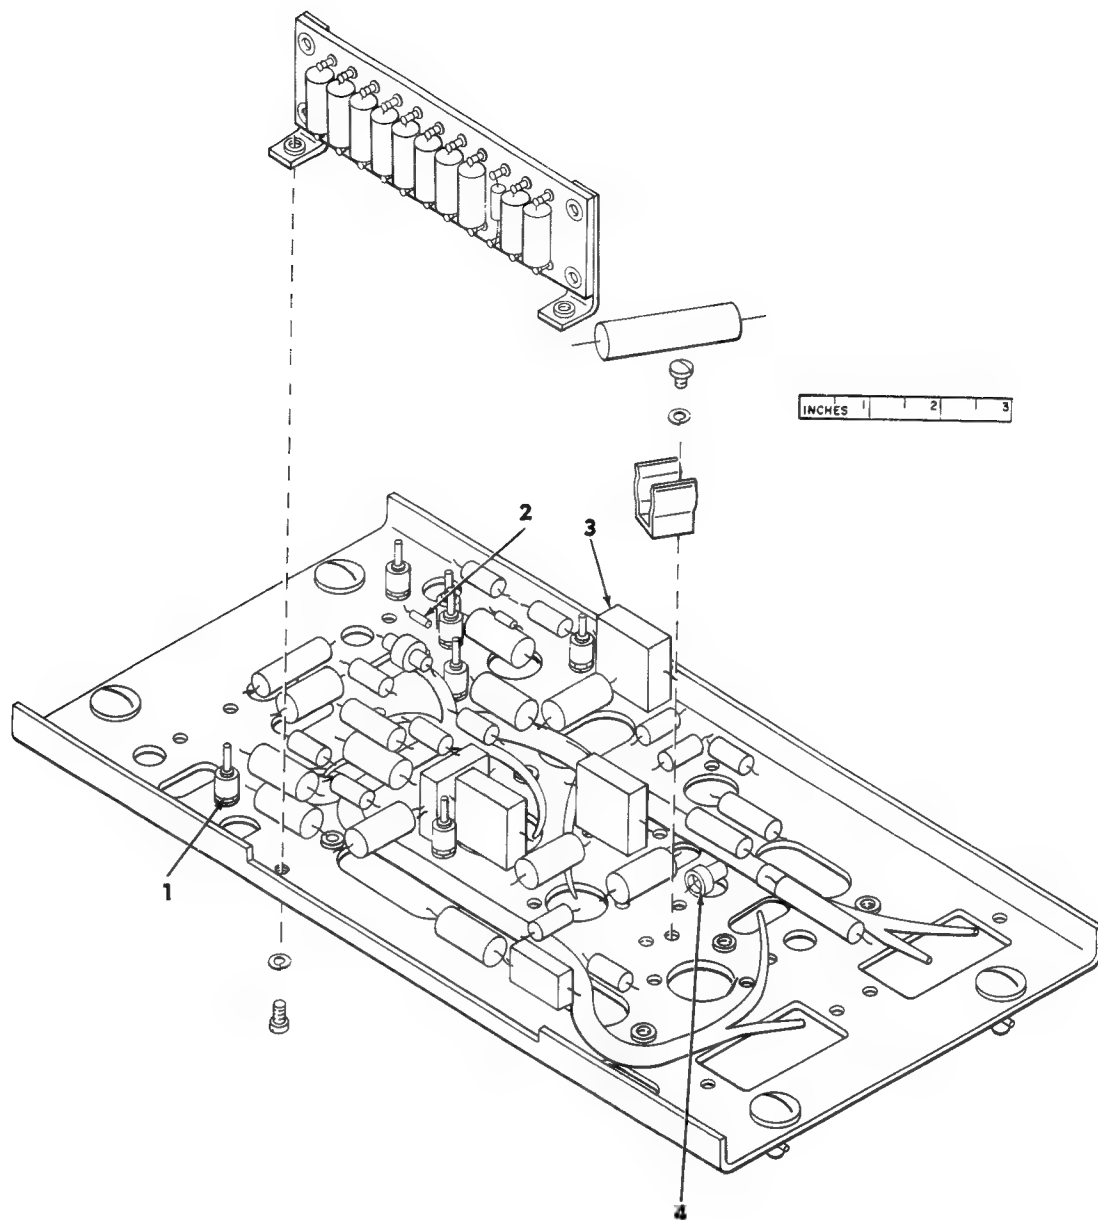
Generator, sweep 0-475/MPA (8172375)—partial exploded view
